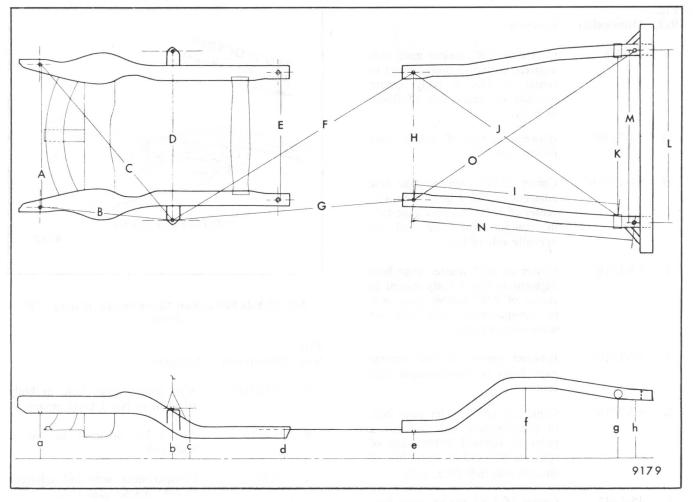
Horizontal and Vertical Checking Dimensions - "X" Bodies
